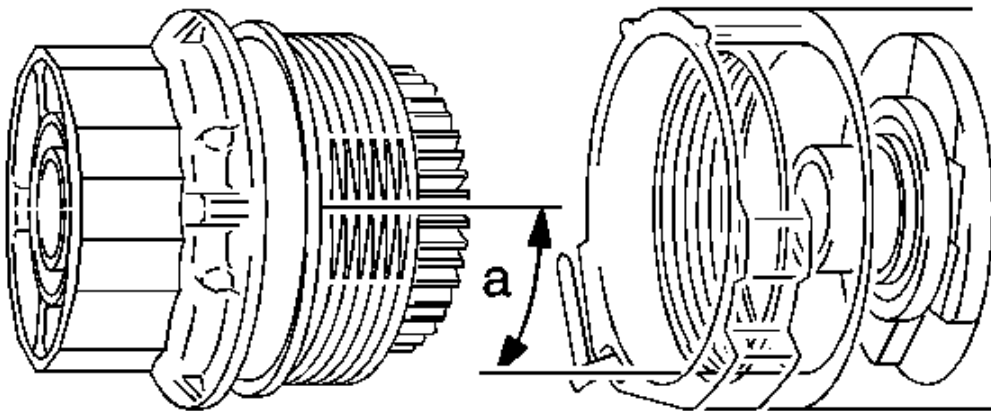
Identifying Correct Tightening Procedure Of Oil Filter
